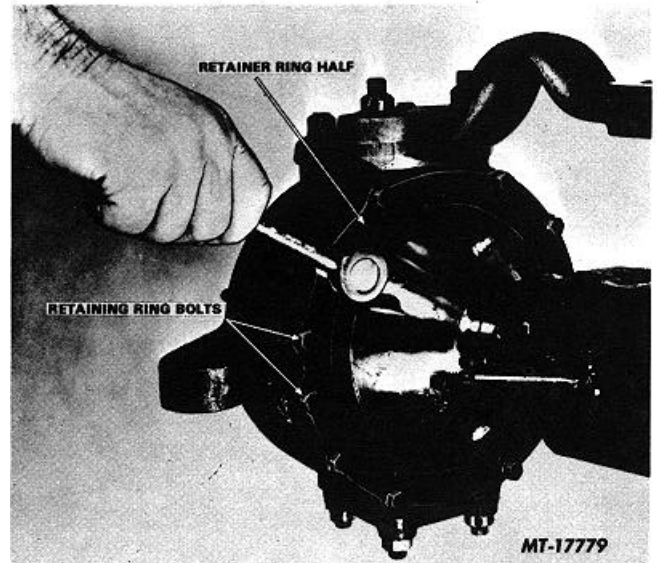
Removing Retaining Ring Half (Halves) Mounting Bolts
